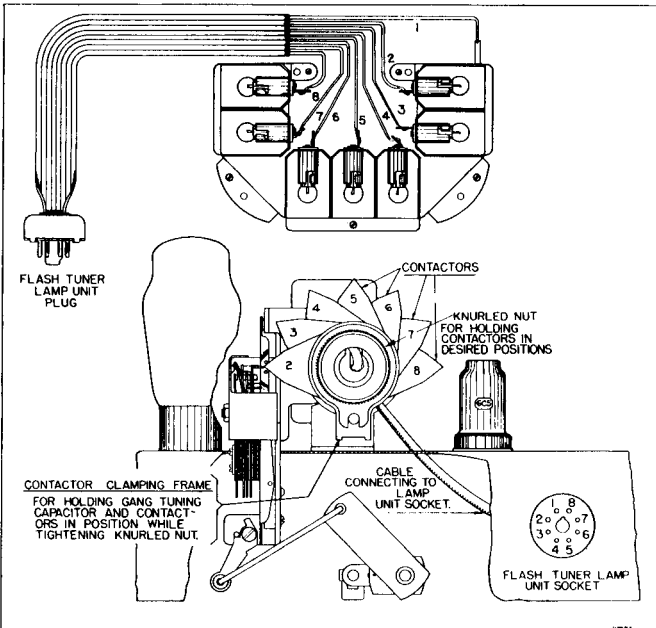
Showing Flash Tuner Lamp Unit With Escutcheon Plate Removed (Top Figure) and Rear View of Receiver Showing Flash Tuner Mechanism (Bottom Figure).
